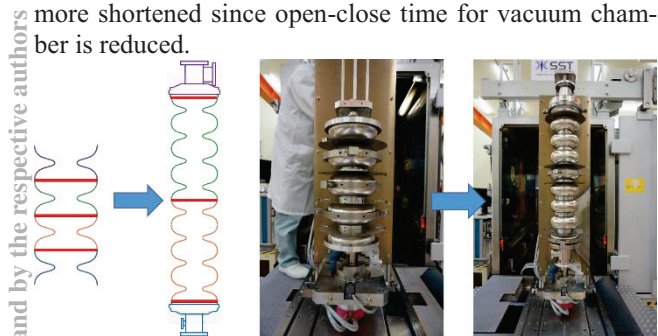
Explanation of current equator welding process (left) and actual photo (right). Red lines in the left picture represent welding position.
